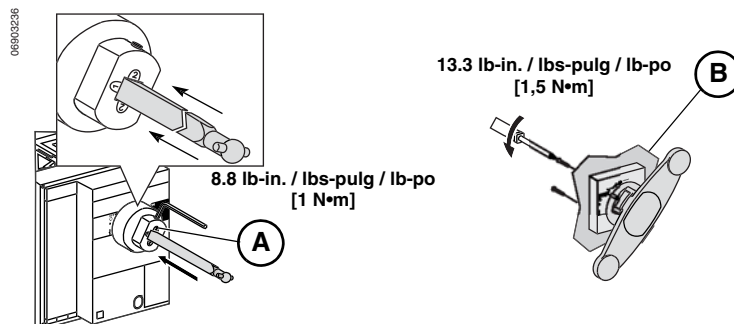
Extended Rotary Handle for Drawout Circuit Breaker /
